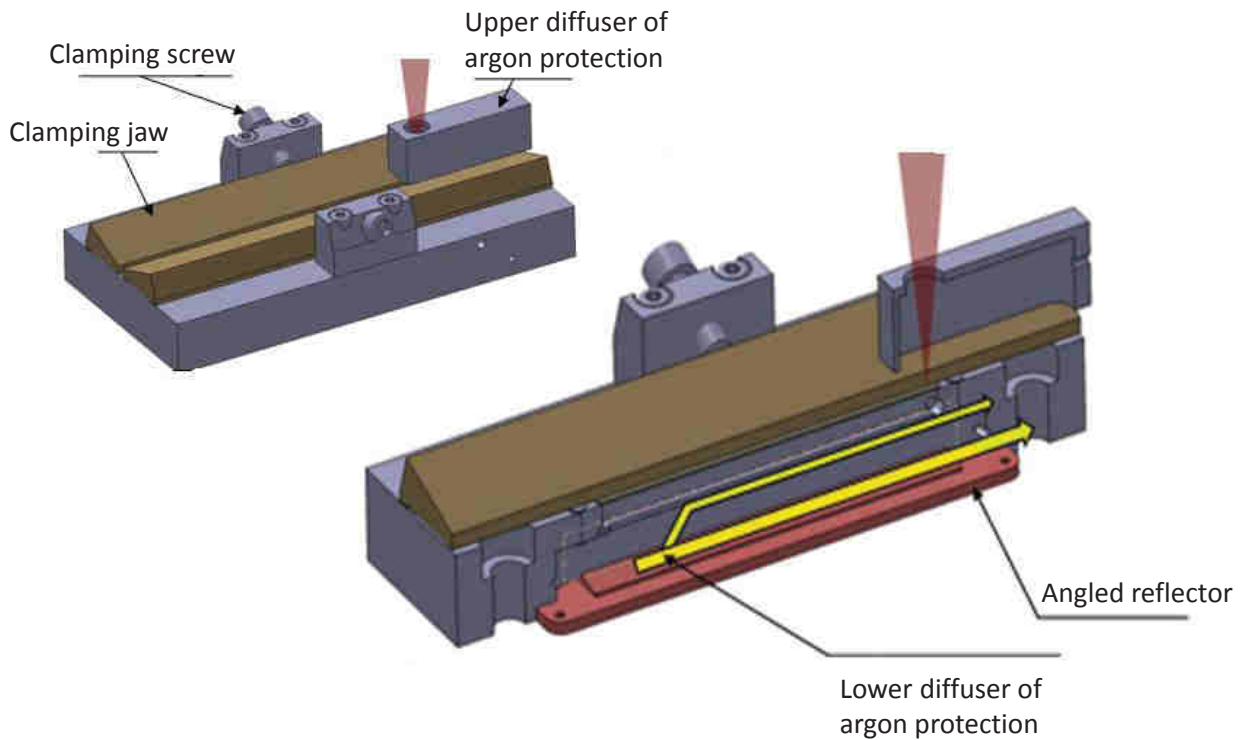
Experimental set-up to weld AA6061 aluminium alloy samples
